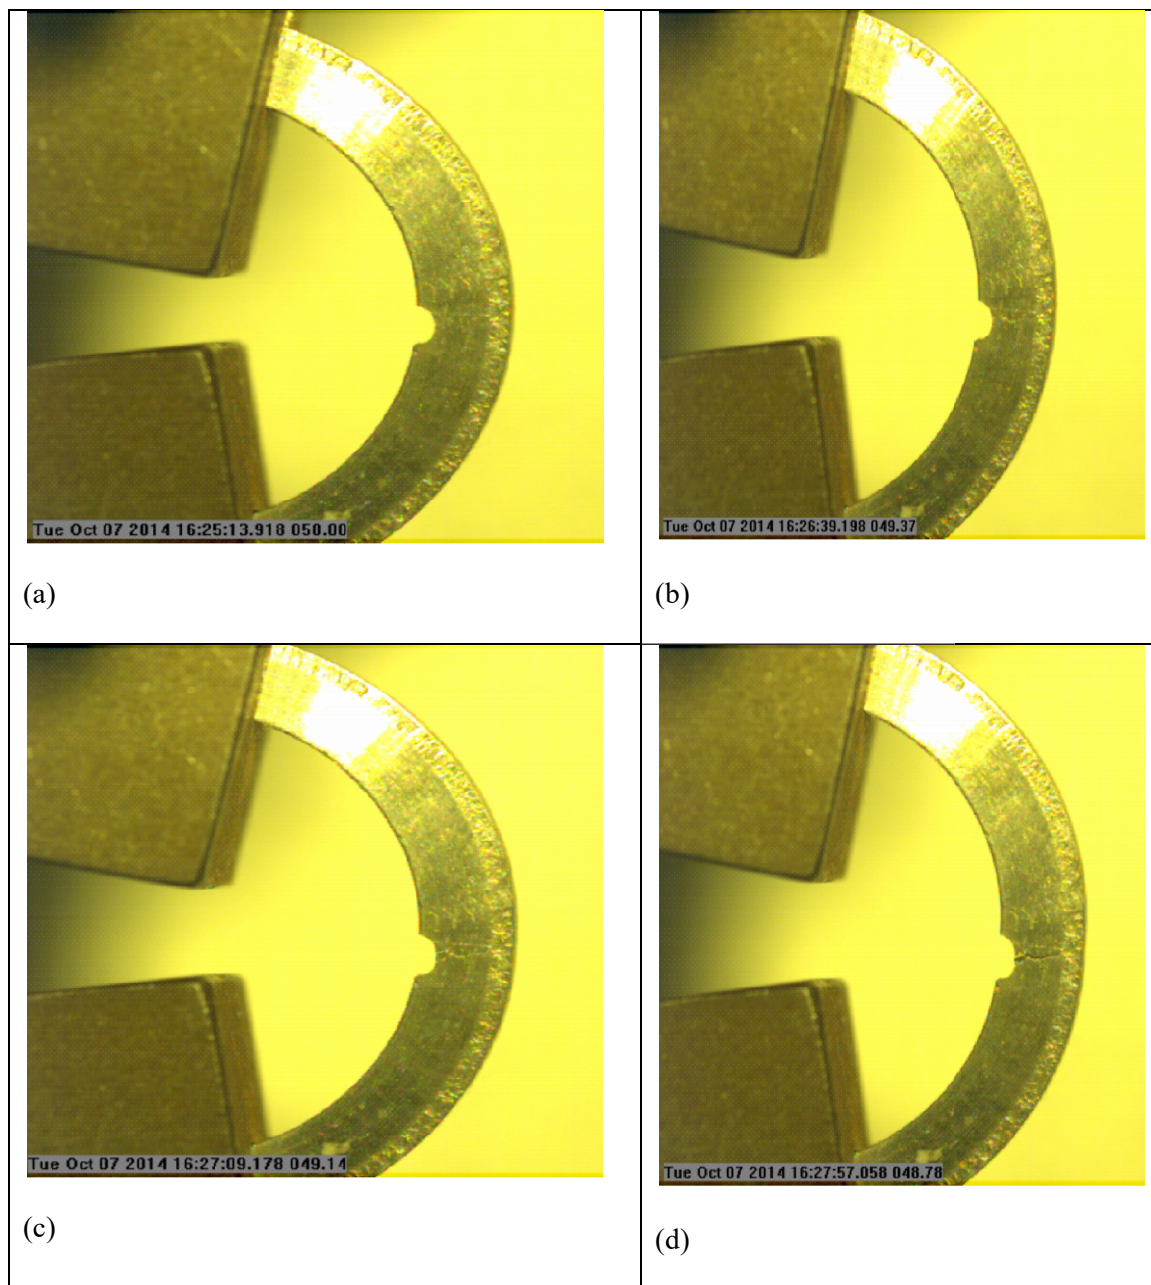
Several frames from the high-speed recording of the fracture toughness test of swaged ~400 micron powder aluminum ring with the loading fixtures attached at the top and bottom of the specimen: (a) frame captured from the beginning of the test; (b) frame captured at the onset of fracture; (c) frame captured just before complete fracture and failure; (d) frame showing the end of the test.
